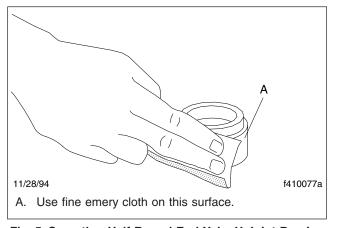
, Smooth a Half-Round End-Yoke U-Joint Bearing Cup
